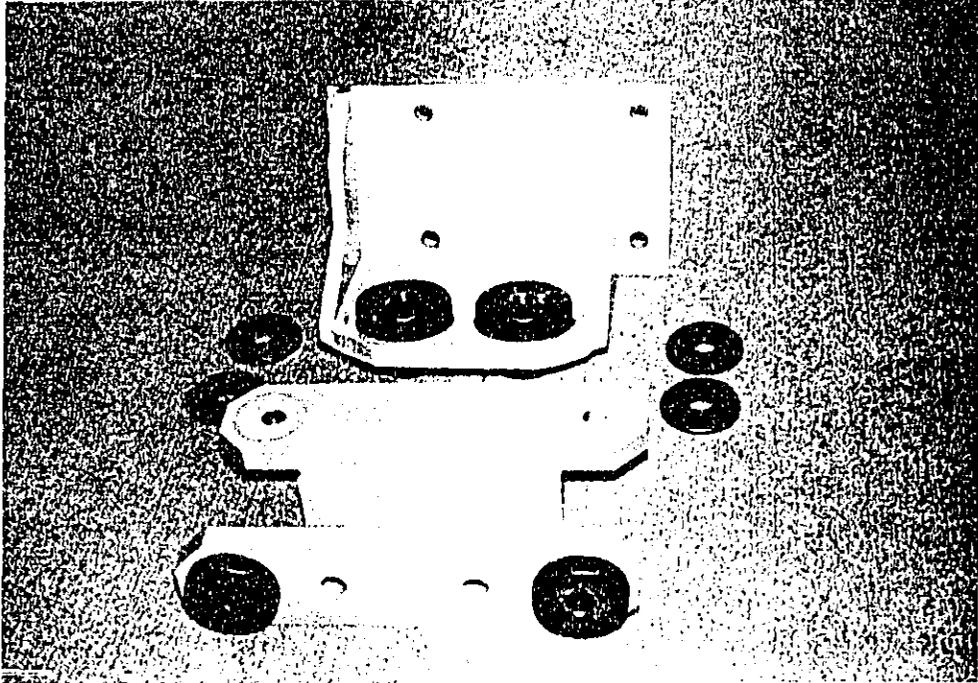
THE TWO-STAGE ENGINE MOUNT DISASSEMBLED.
